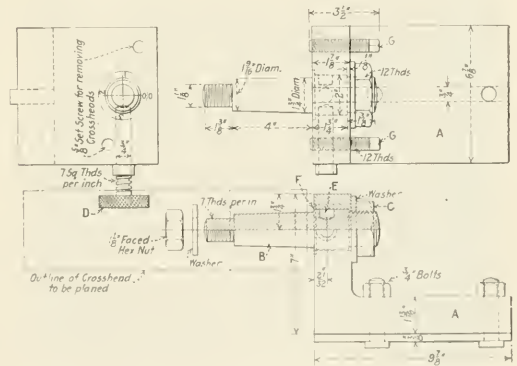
Jig for Use in Planing Valve Stem Crossheads
